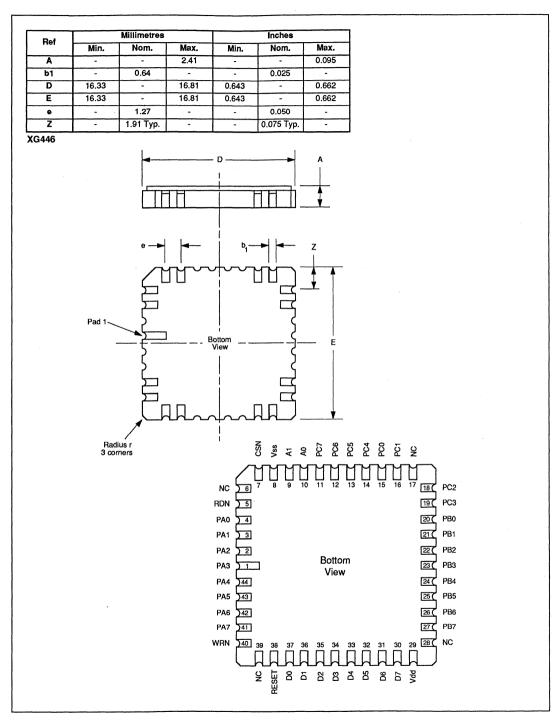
44-Pad Leadless Chip Carrier (Package Style L)
